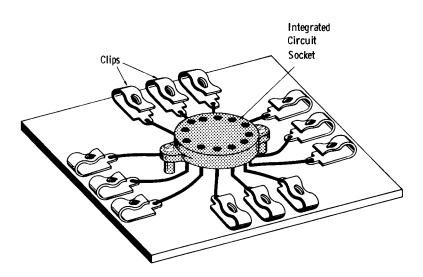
Mounting integrated circuit socket for experimental use.
